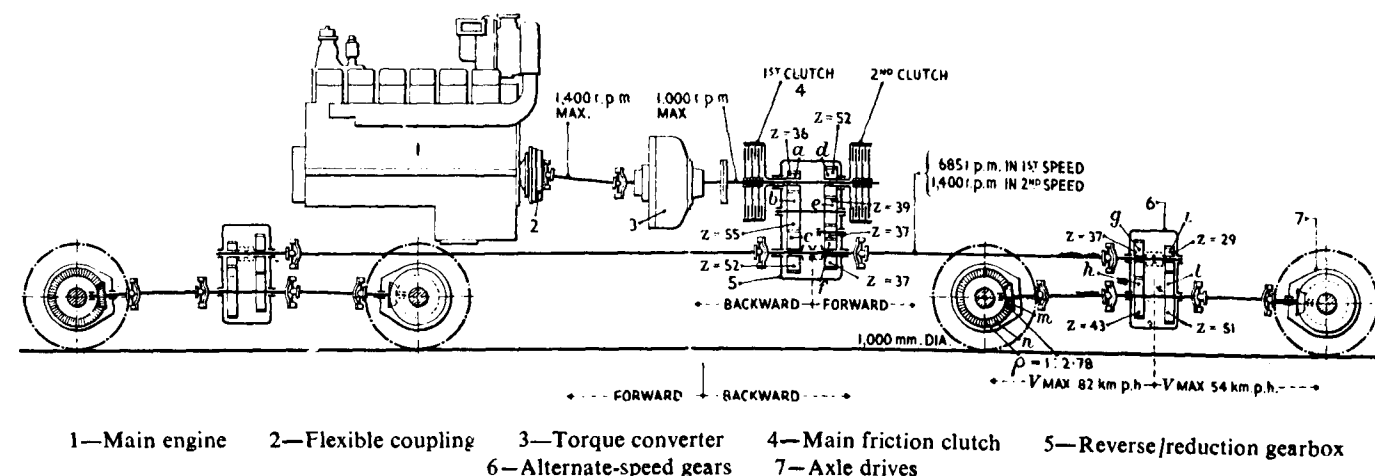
Arrangement of hydraulic transmission, reduction gears and cardan-shaft drive to all axles of Reggiane 920 b.h.p. locomotive
